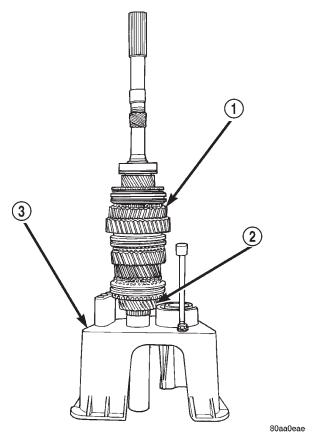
Output Shaft And Geartrain Installed In Input Shaft
